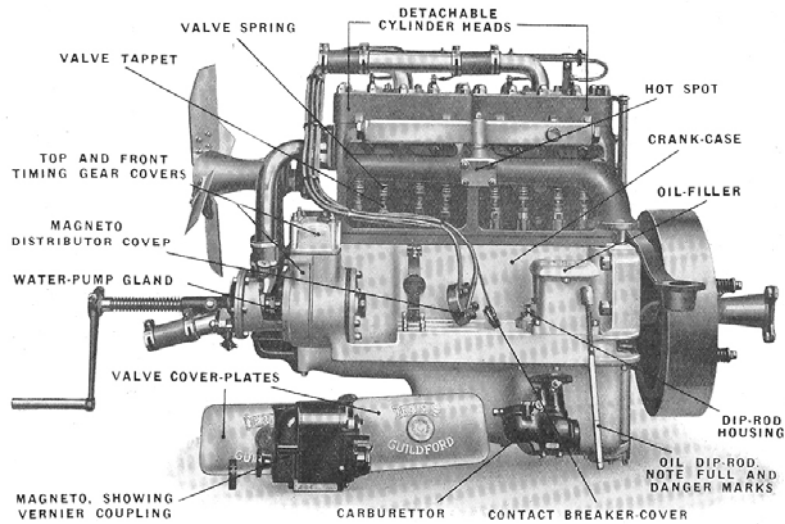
The same view as above, but showing Magneto, Carburettor, Valve Cover Plates and Dip-rod removed.
